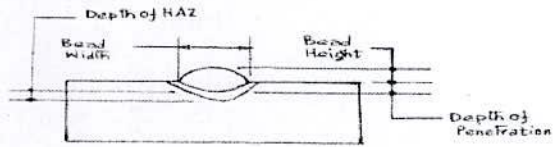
(d) Sketch of Weld Bead Geometry and Heat Affected Zone
